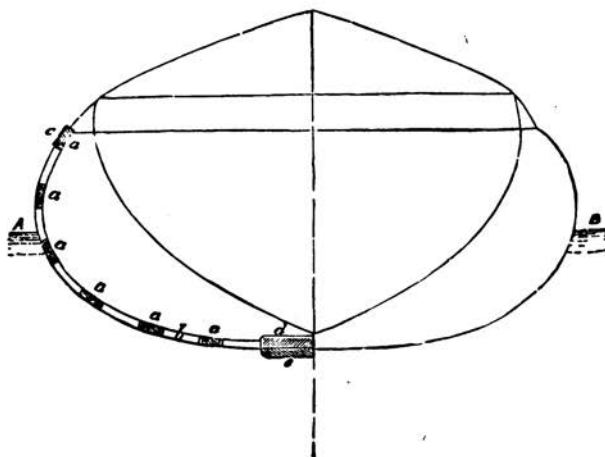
CROSS SECTION OF CANVAS CANOE, SHOWING LONGITUDINAL STRINGERS.
